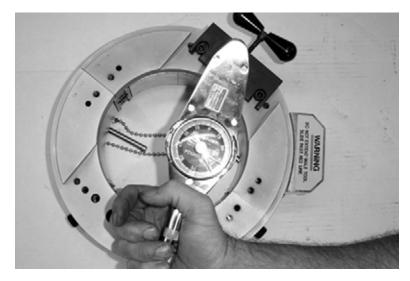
The fixture plate will hold the eccentric shaft as you set the bearing wheel against the "V" groove.
